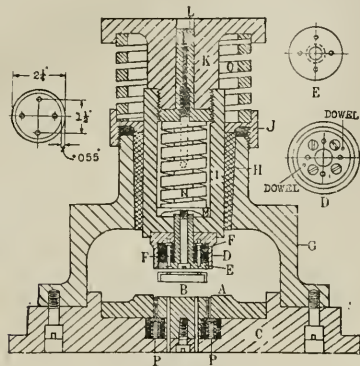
SUB-PRESS FOR BLANKING, DRAWING AND PUNCHING
